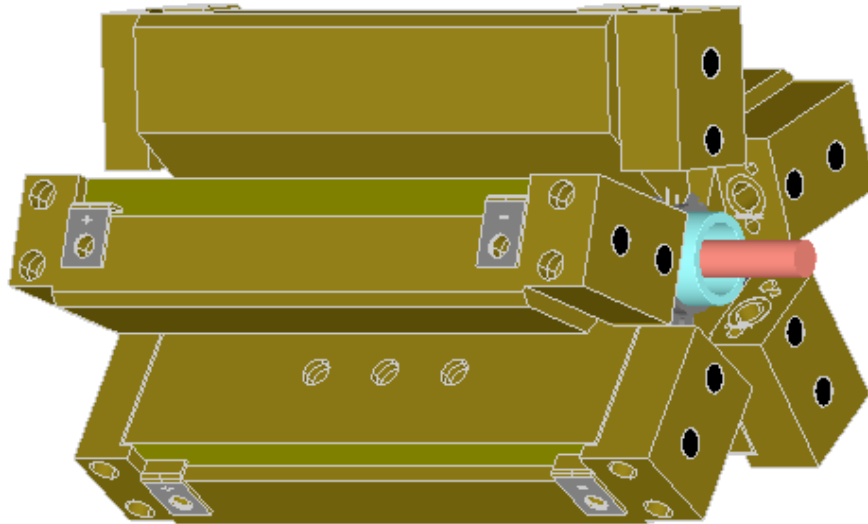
3-dimensional CAD model of the power scaled gain-module showing a pump chamber and directly coupled 8-bar diode assemblies in 5-fold symmetry (illustrated without the mechanical housing and cooling water manifolds).
